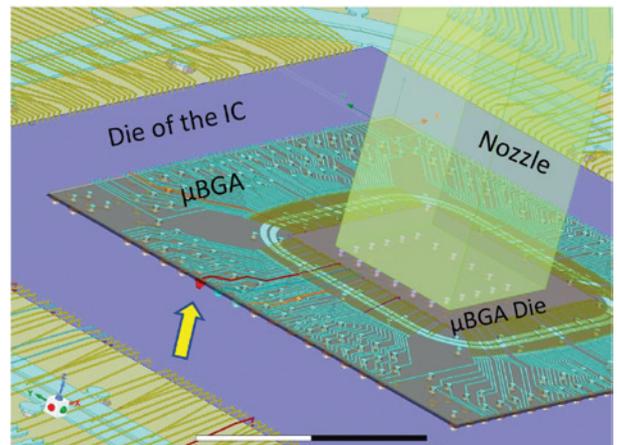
3D assembly scenario where 7 mm x 7 mm size μ BGA is assembled on top of a larger 28x28 mm size IC. Both components have a leadframe, bondwires, and joints under the package.
